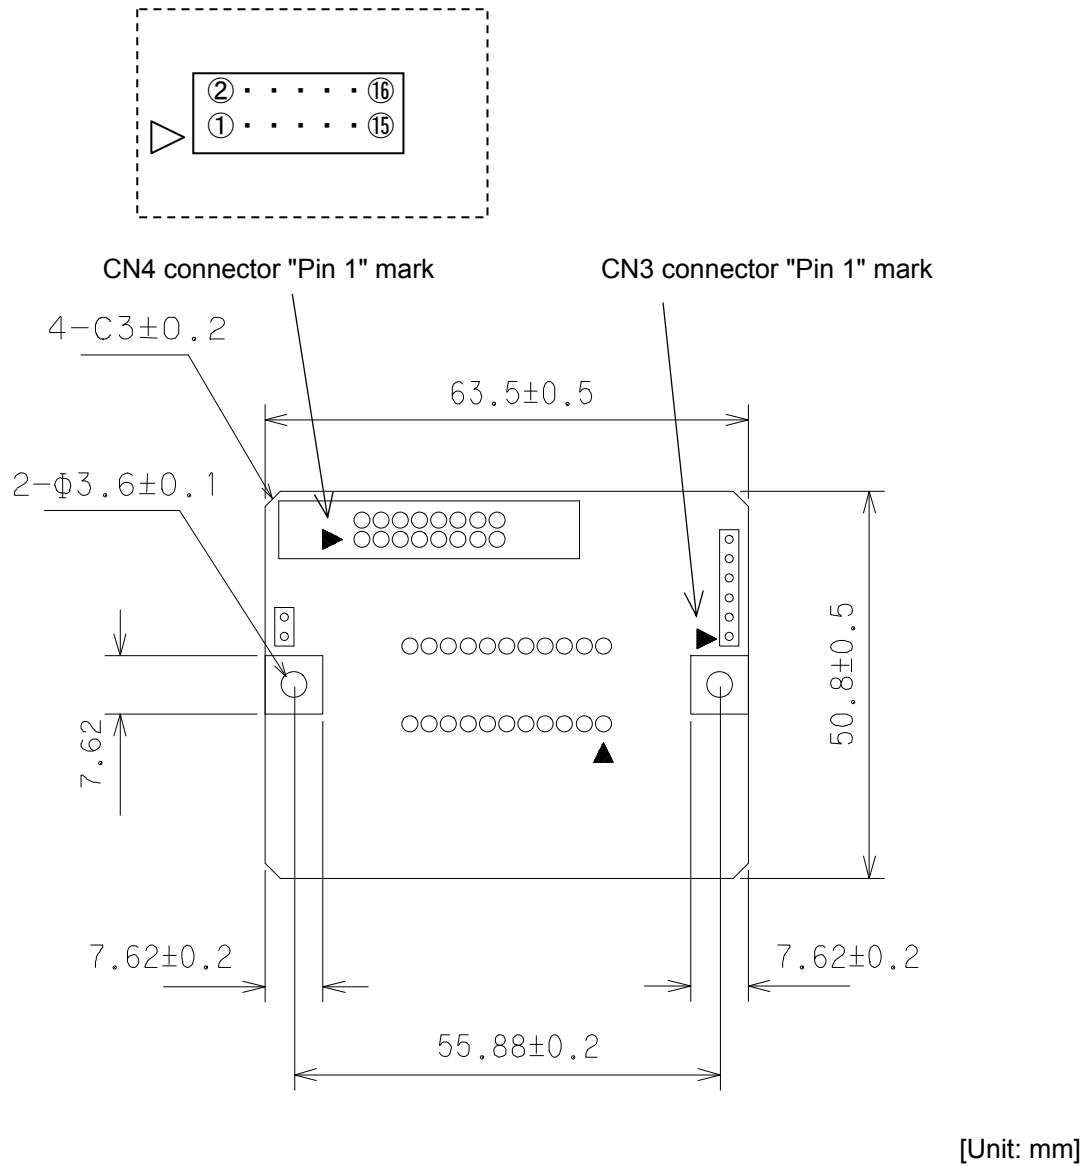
Dimensional outline of C10808 and C10808-01 (component side)
